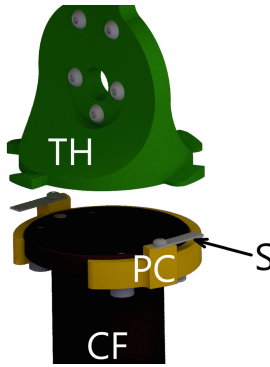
The bayonet coupling between target-holder TH and the cold finger CF of the cryocooler. After lifting of CF to contact the base of TH, a 25° rotation engages one couple of TH wedges with the flexural springs S, bringing them in contact with the limiters on the positioning cup PC.
